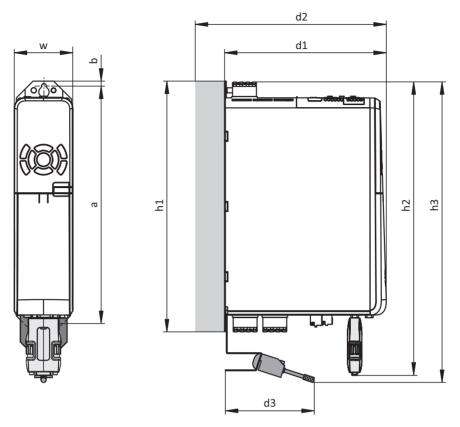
SD6 dimensional drawing, sizes 0 to 2
